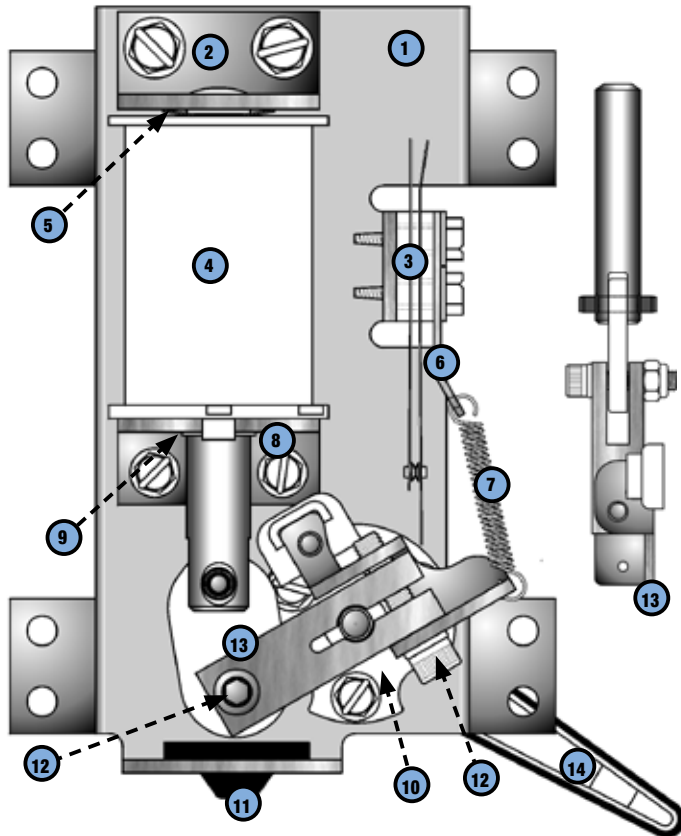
Left flipper assembly 500-6543-02-ND bottom view.
